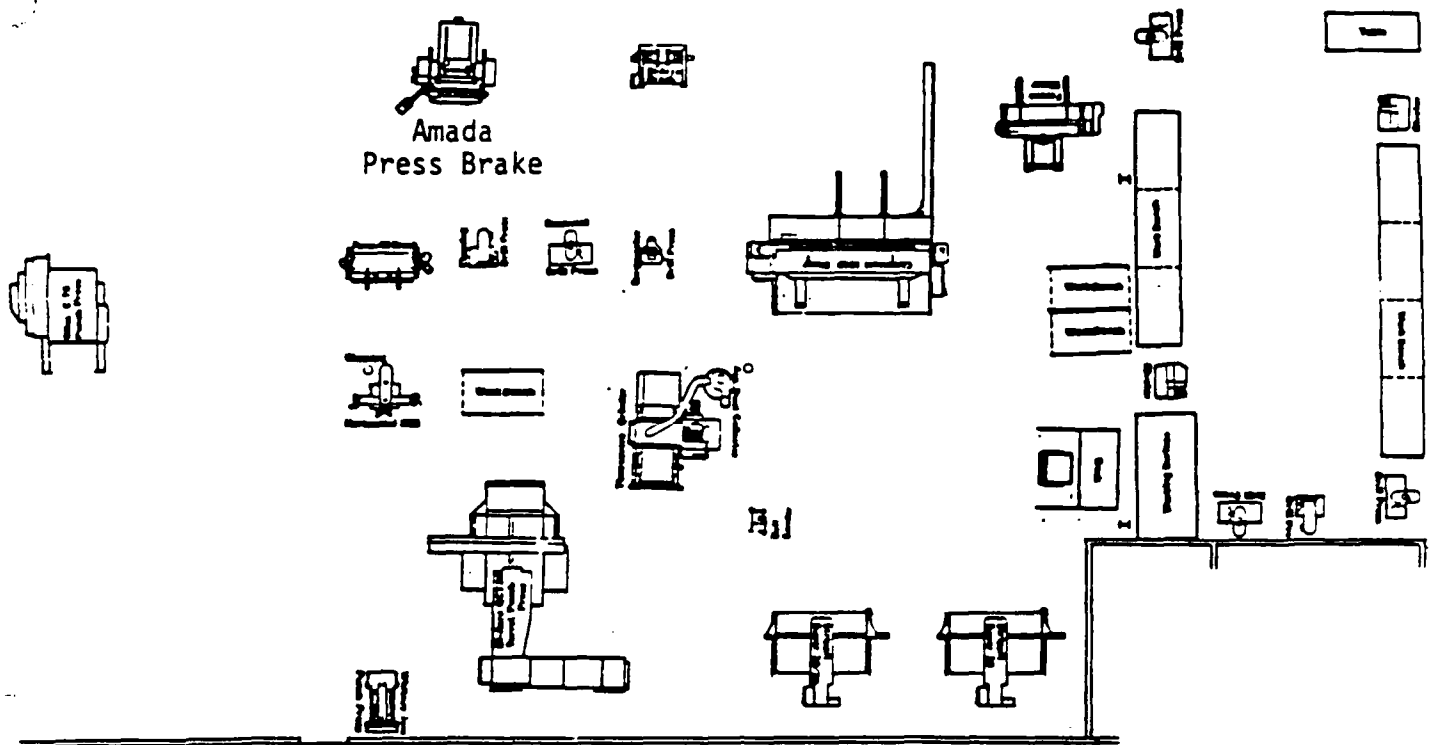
IMPROVED SHEET METAL SHOP LAYOUT
